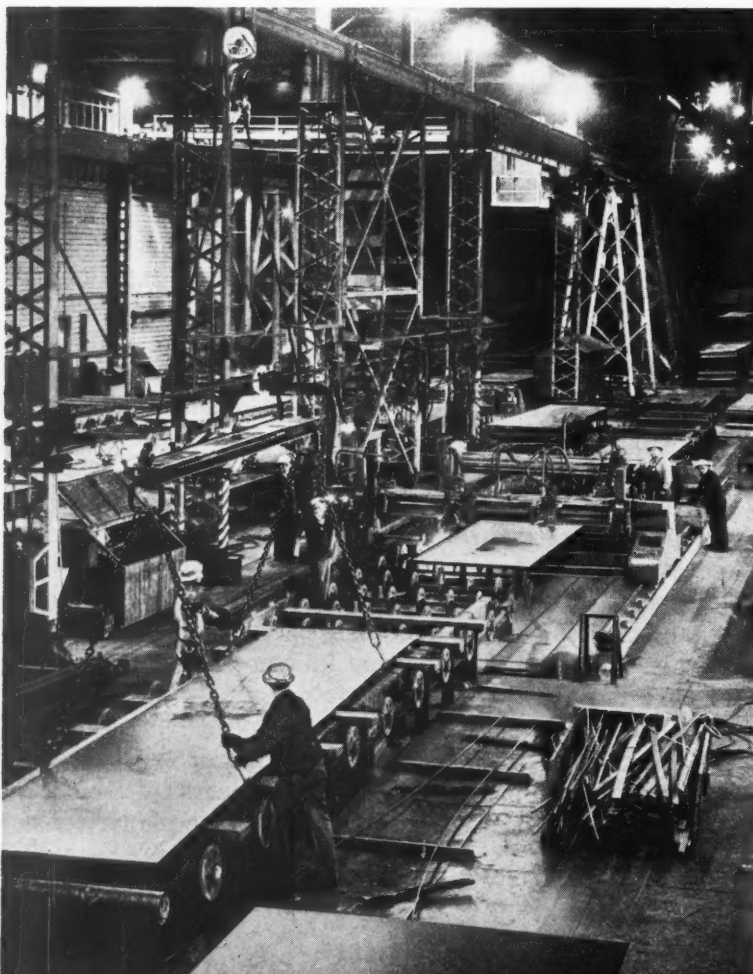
View of a large flame planer type of plate cutting installation used in a shipyard to cut and edge plates prior to welding
